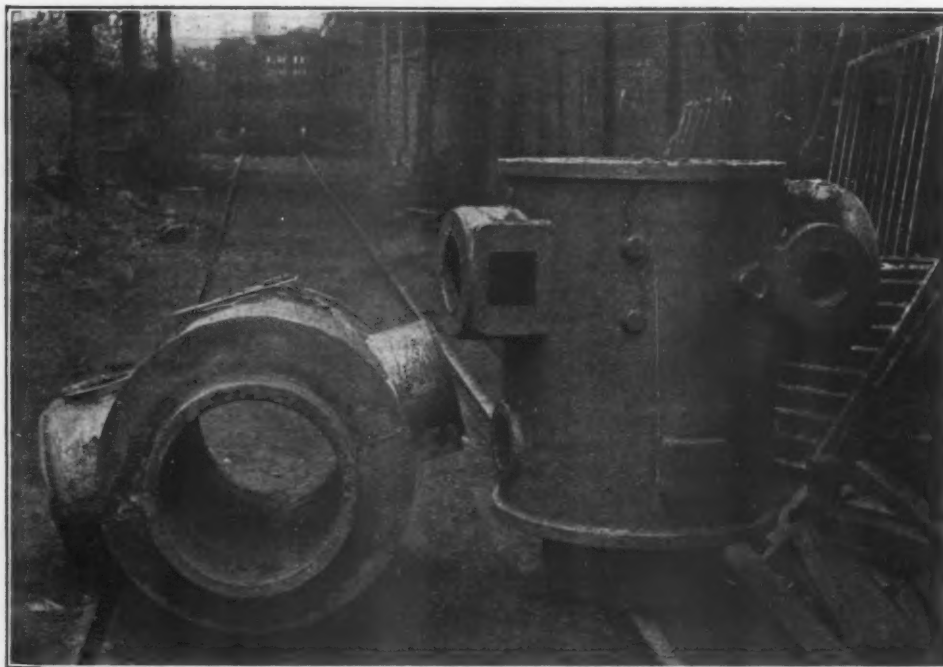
Gas Engine Cylinders, 18 In. Bore, 21 In. Stroke.—Molds Made on Machine. Time for Skilled Mechanic with Helper, 9 Hr. Weight, 3650 Lb.
